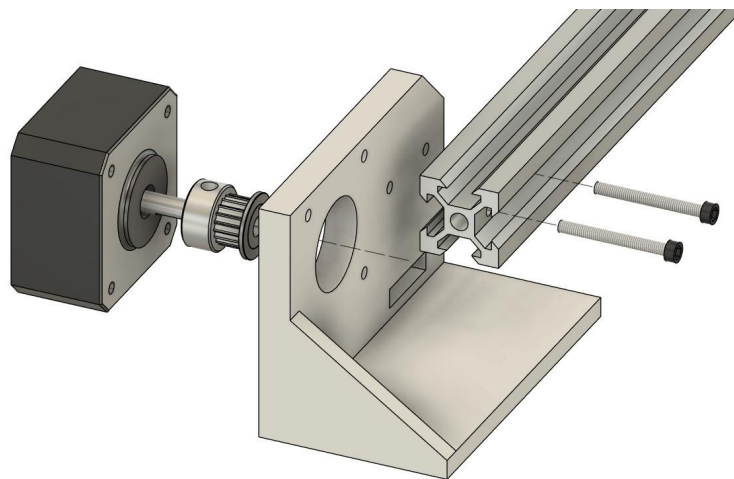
Exploded view of the stepper mount and the relevant parts. Screws for mounting the stepper motor are not visible.
